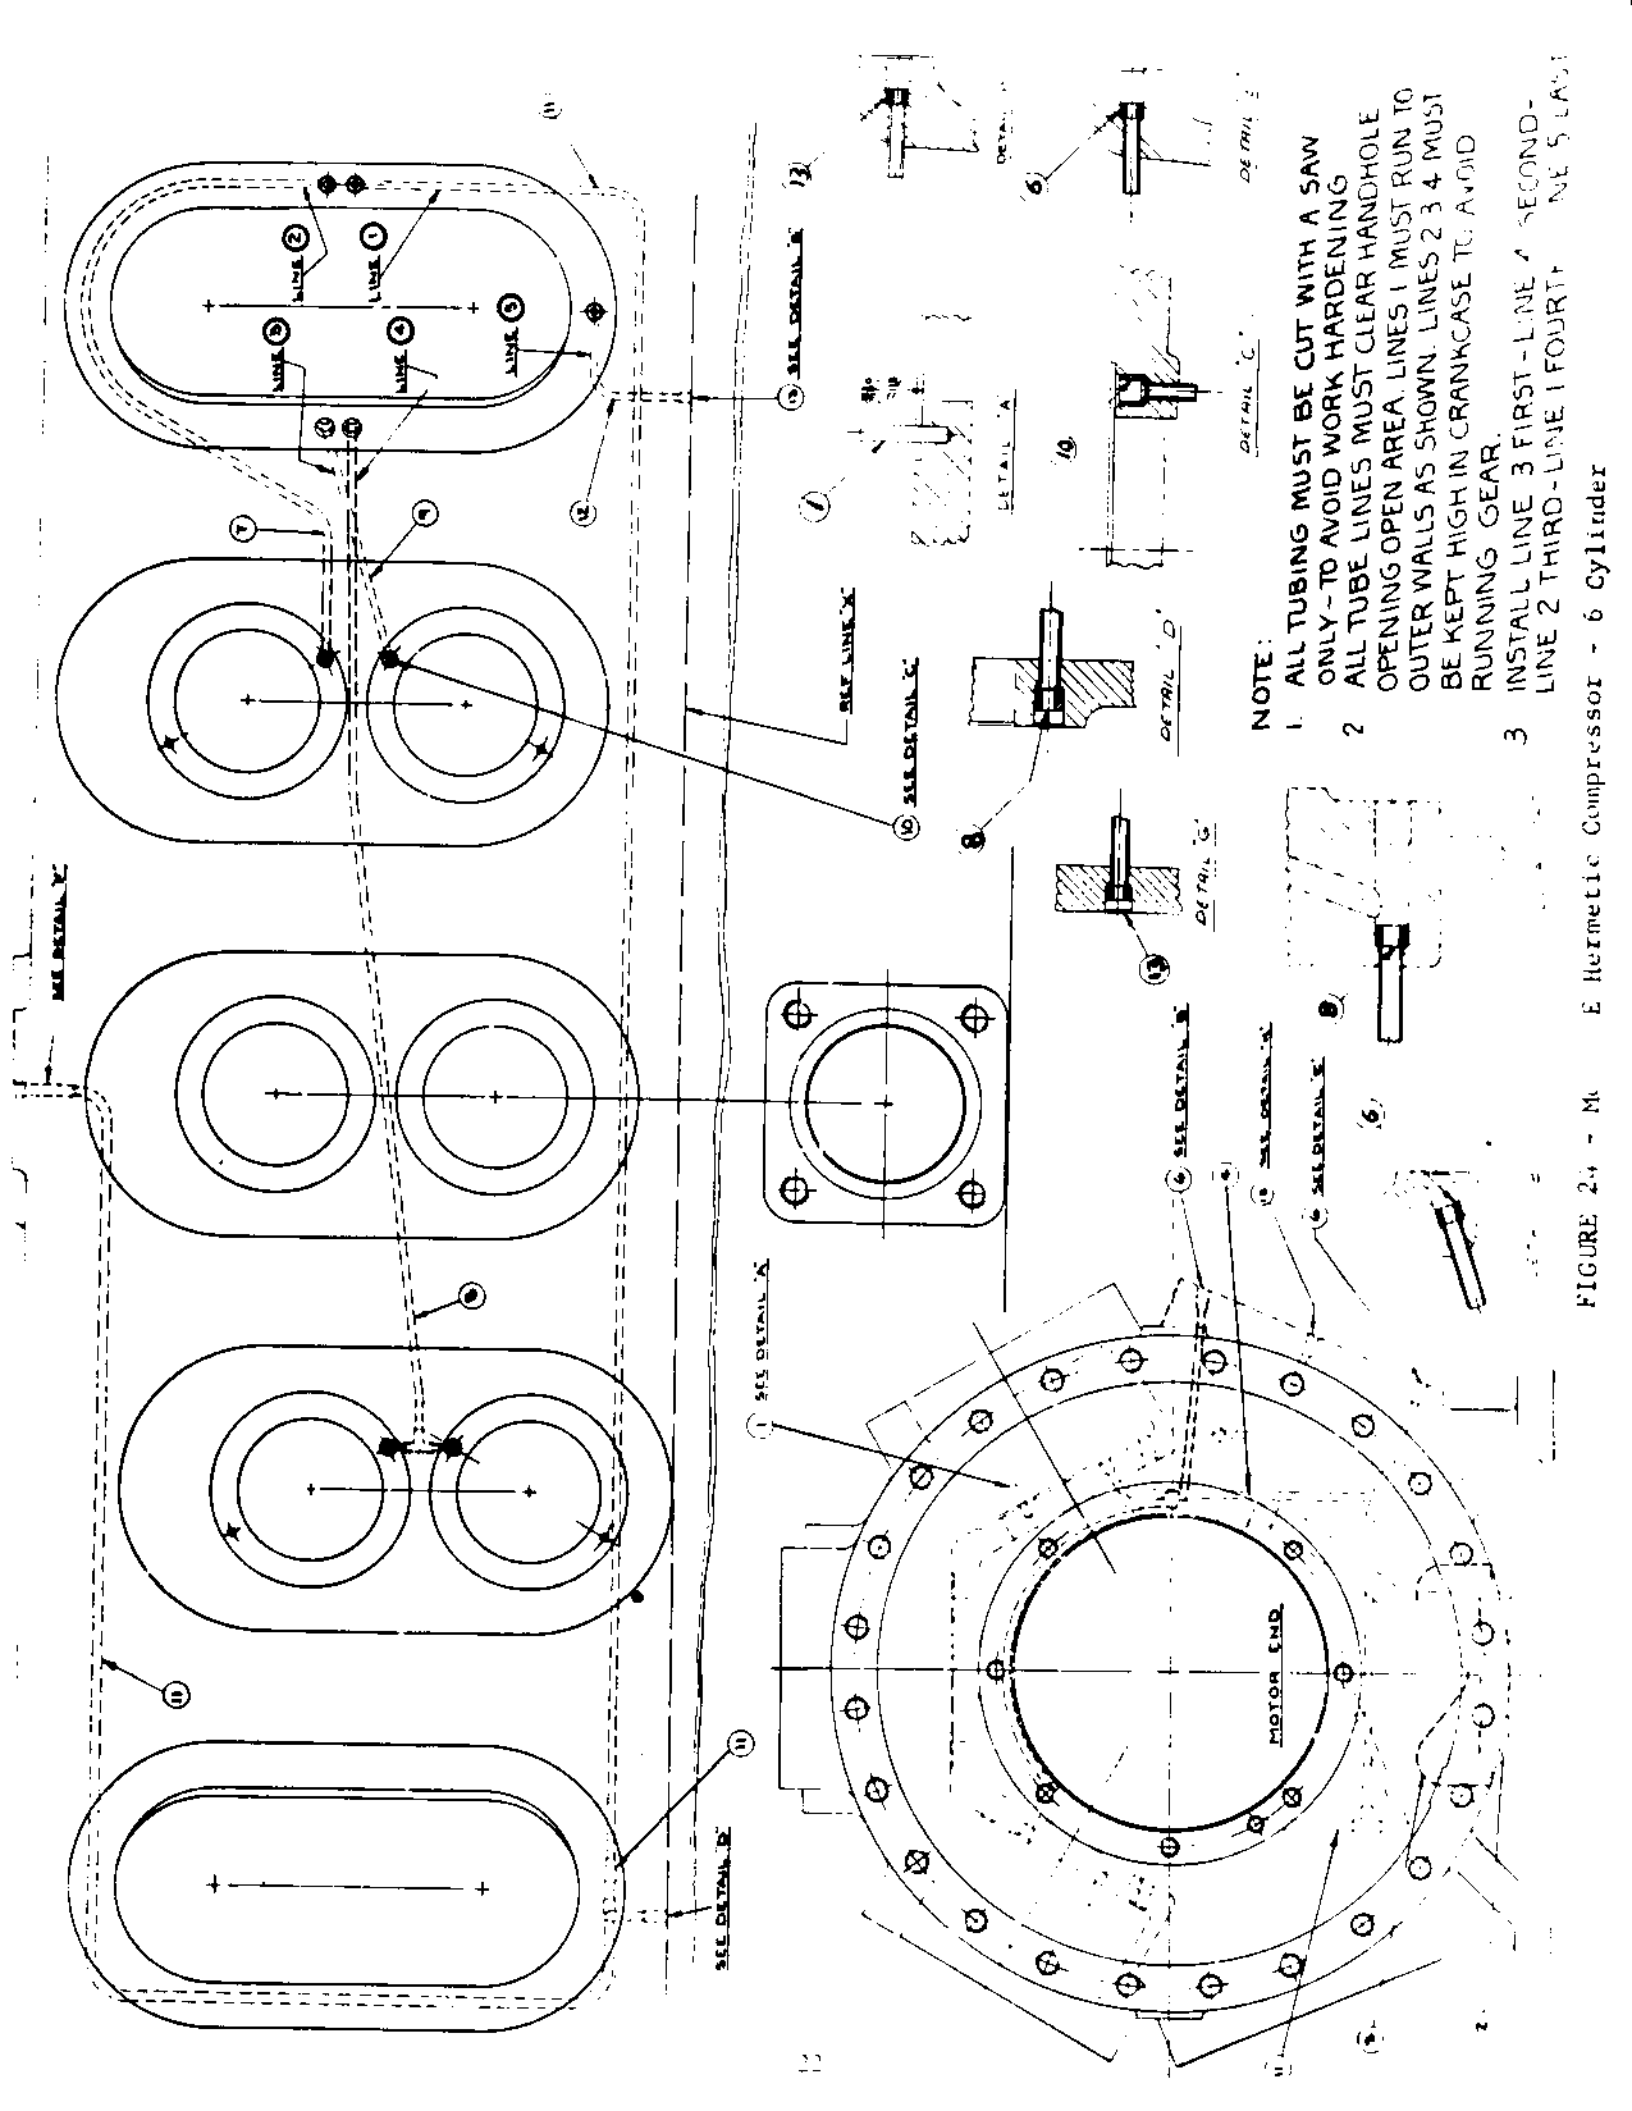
Mc E Hermetic Compressor - 6 Cylinder
